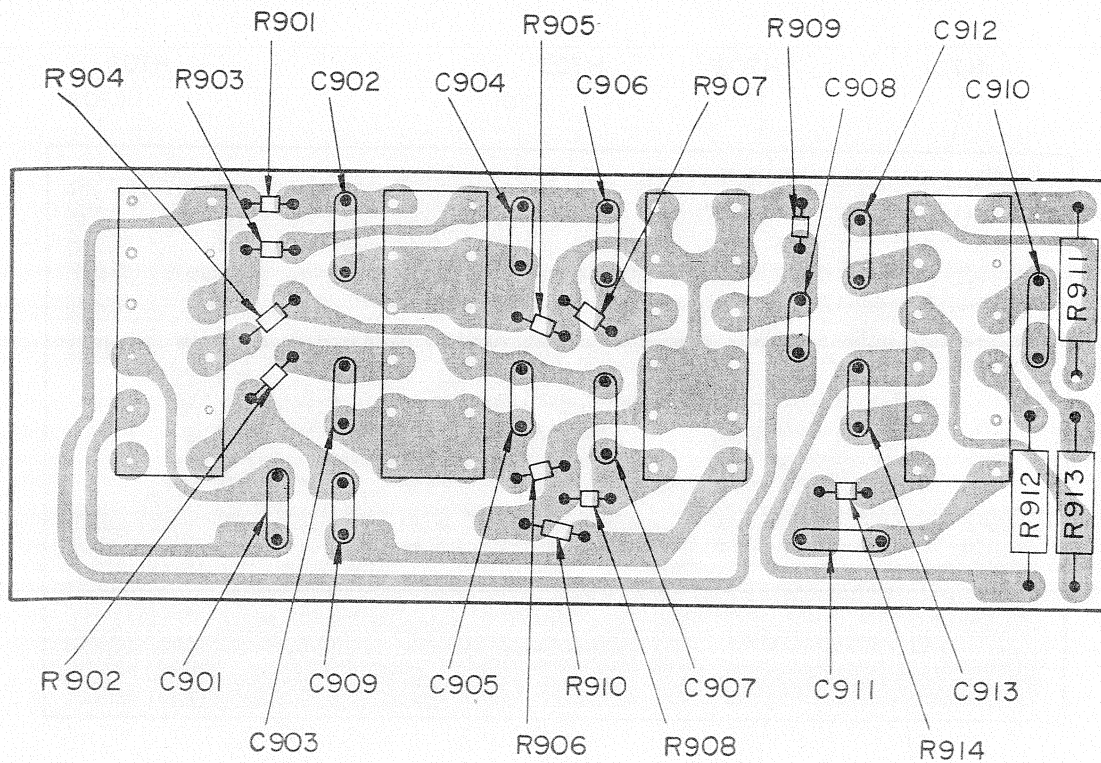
Hi Blend, Low Filter, Hi Filter and Loudness Switches Unit Assembly P900 Component Locations
